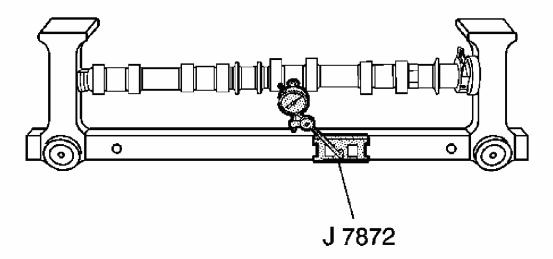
Measuring Camshaft Runout Courtesy of GENERAL MOTORS CORP.
